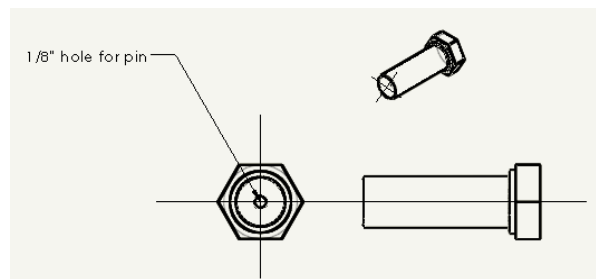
Bolt connecting fitting to top of wind tunnel test section
